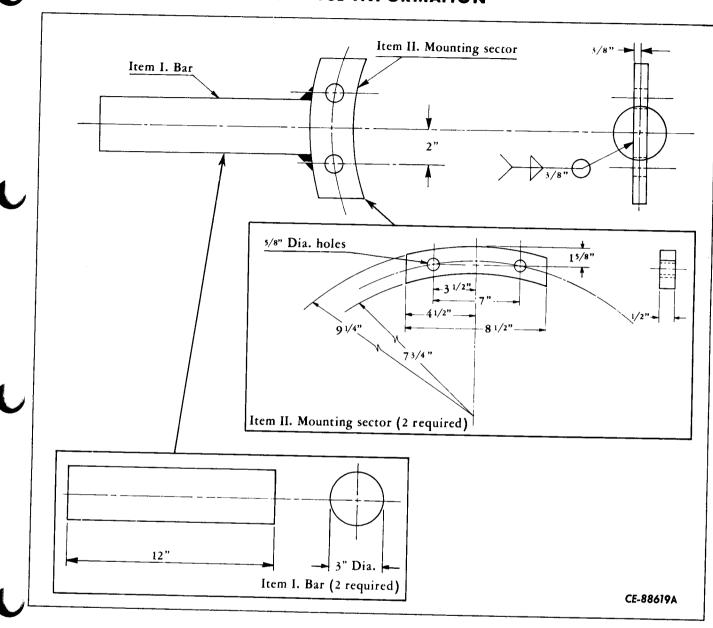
A. Swivel Weldment (2 Required).
